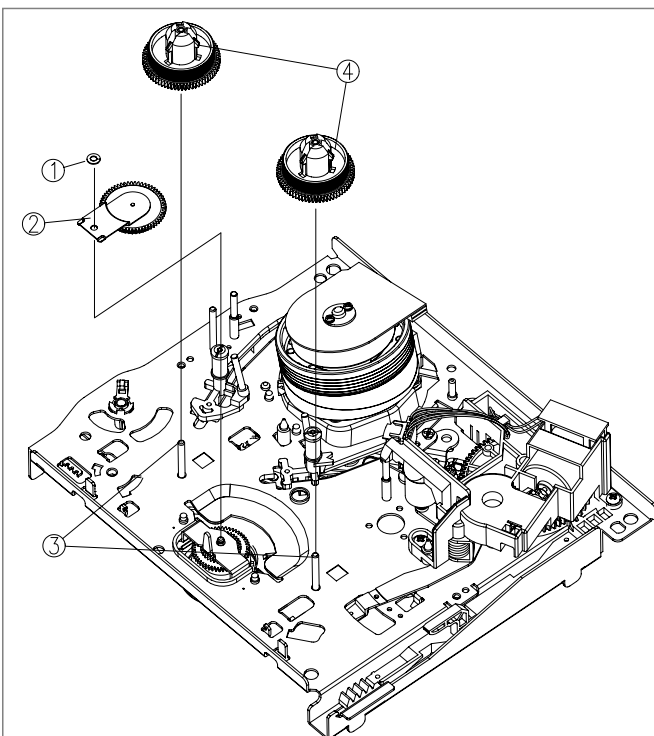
Disassembly of the REEL TABLE and the IDLER PLATE TOTAL ASS'Y
